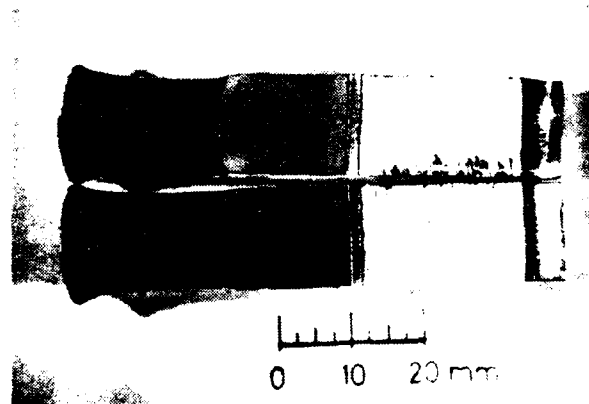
Fracture surface of a specimen produced in air showing a straight crack front and macroscopic beach marks.
